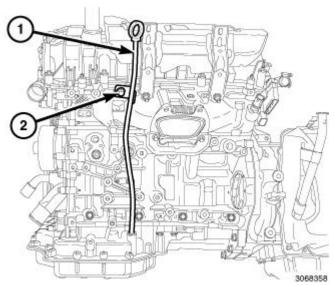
Oil Level Indicator Tube & Bolt Courtesy of CHRYSLER GROUP, LLC
